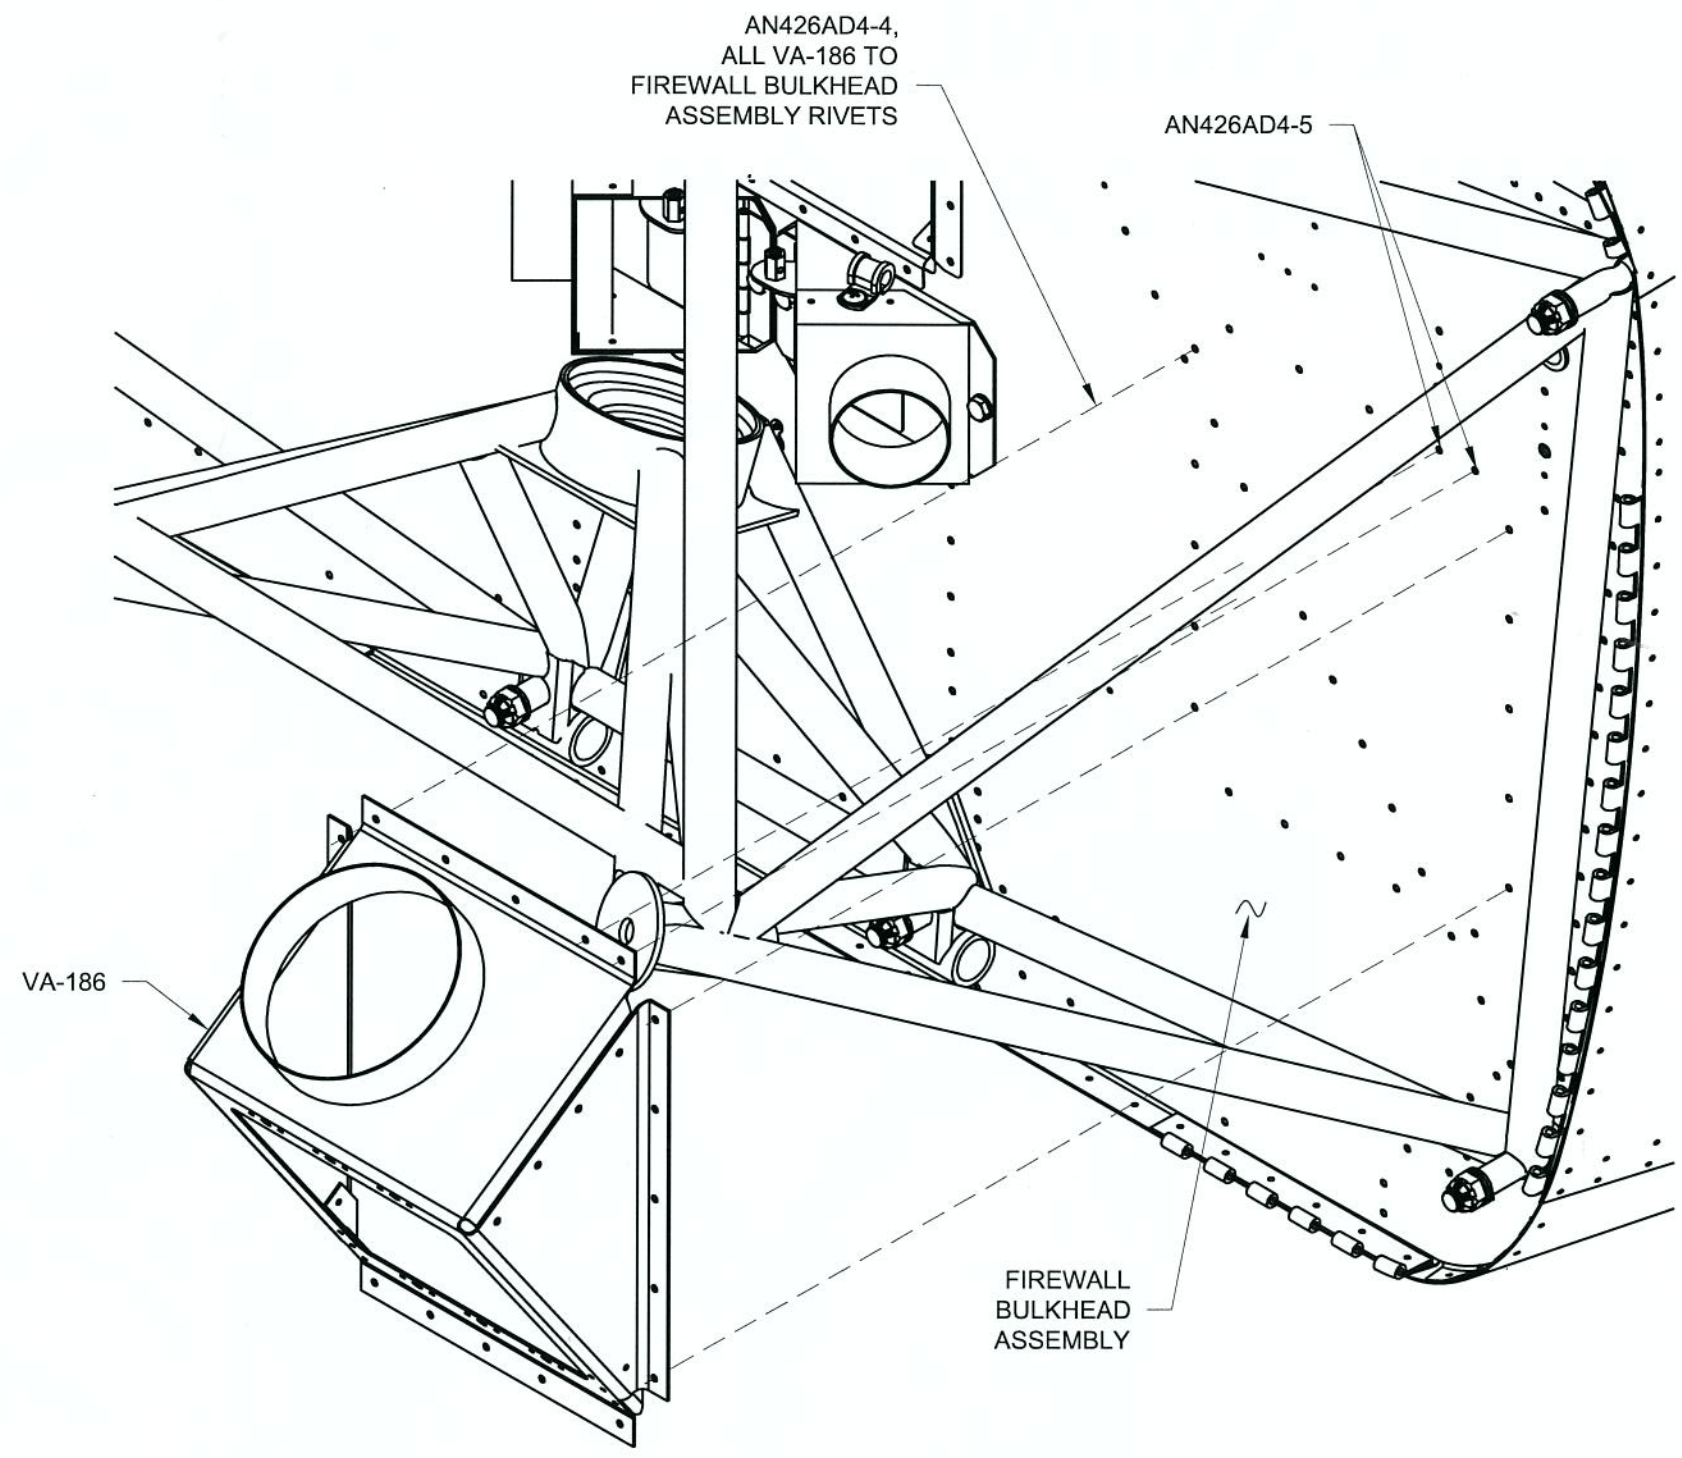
INSTALLING THE OIL COOLER BOX ASSEMBLY
